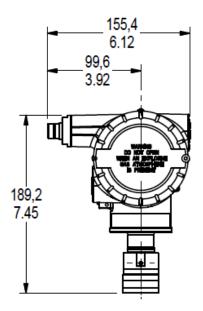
In-Line gauge, typical mounting dimensions for STGW84L, STGW87L (remote adaptor shown)
